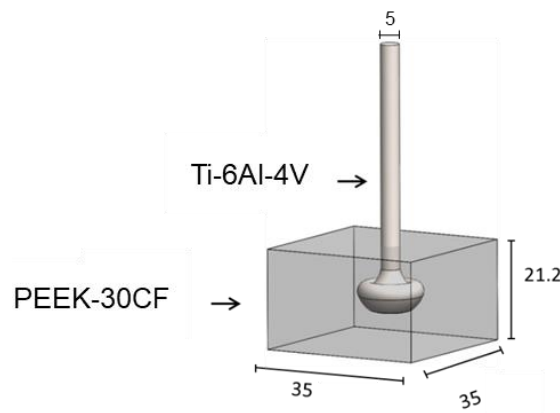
Configuration and dimensions (in mm) of the FricRiveting joining parts.
